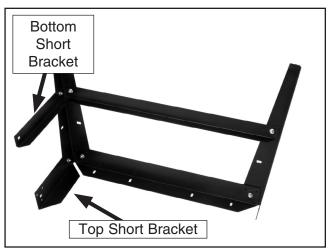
Top and bottom short brackets secured to a stand leg assembly.
